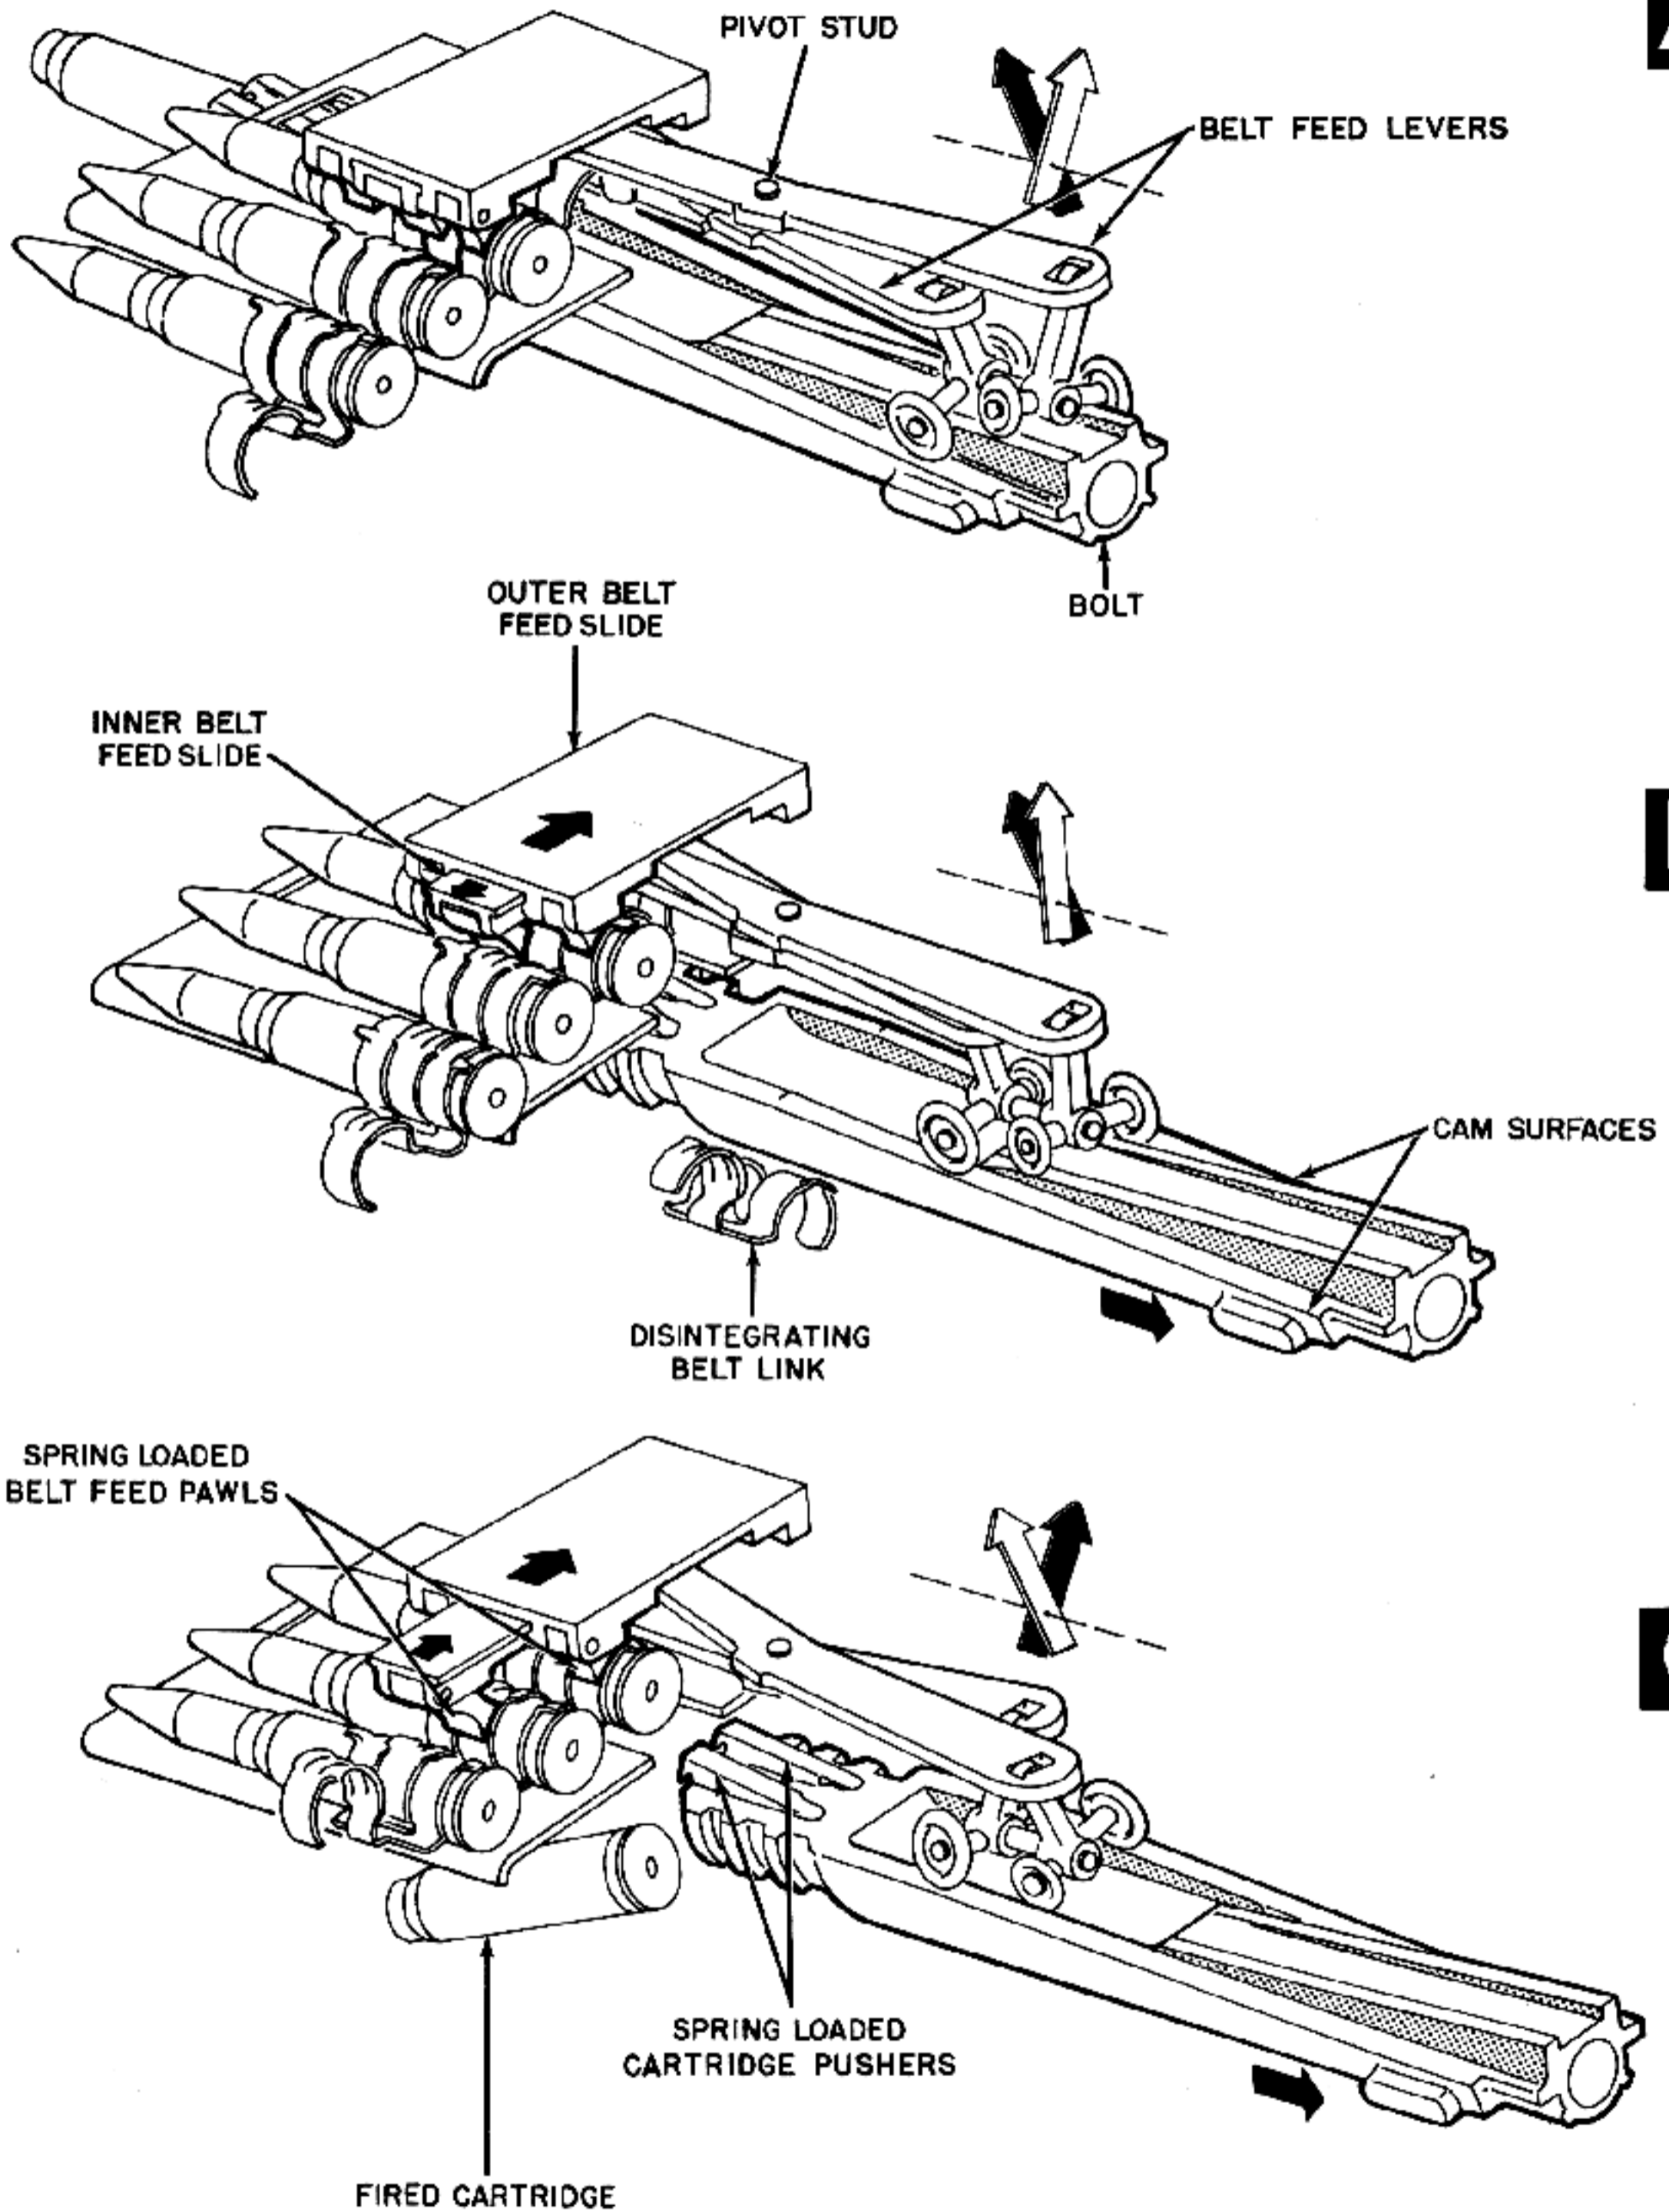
Cam Surfaces on Bolt Actuate Belt Feed Lever.
